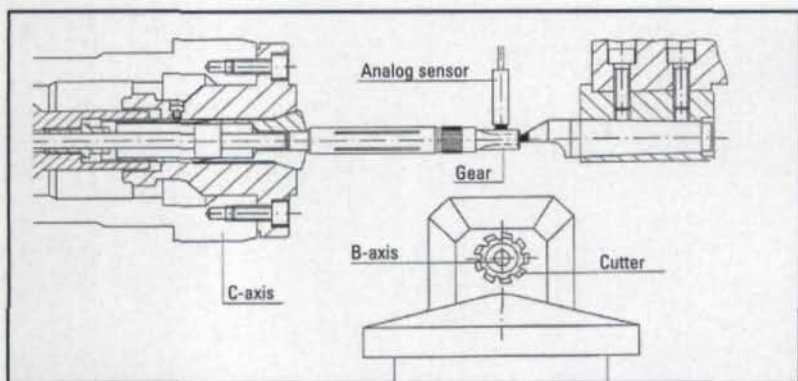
Electronic gear-to-hob alignment and stock dividing.
